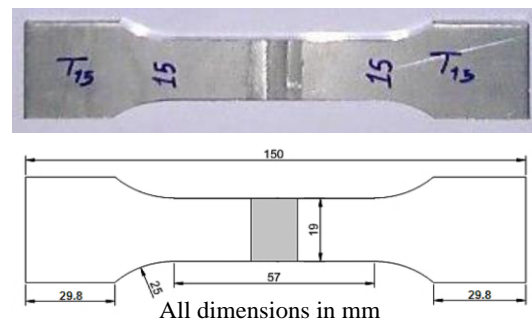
Photograph and schematic of standard tensile test welded specimen
